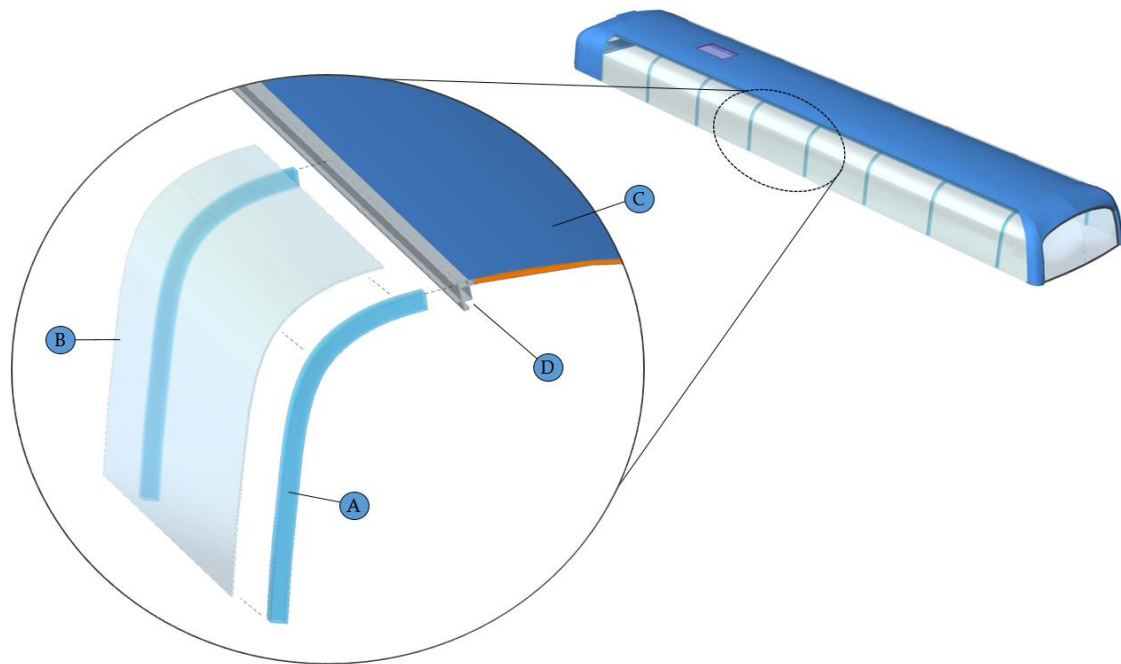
An exploded view of the proposed structure. Curved beams (A) support a sandwich panel roof structure (C) which incorporates the cantrail aluminium extrusion beams (D). This structure would support panoramic curved glazing panels (B).
